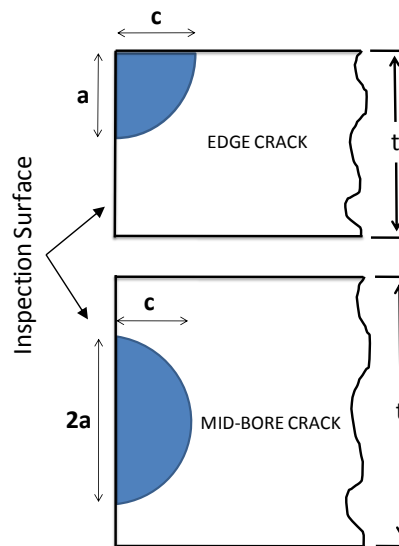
Crack profile for inspection of fastener holes or bore holes.
